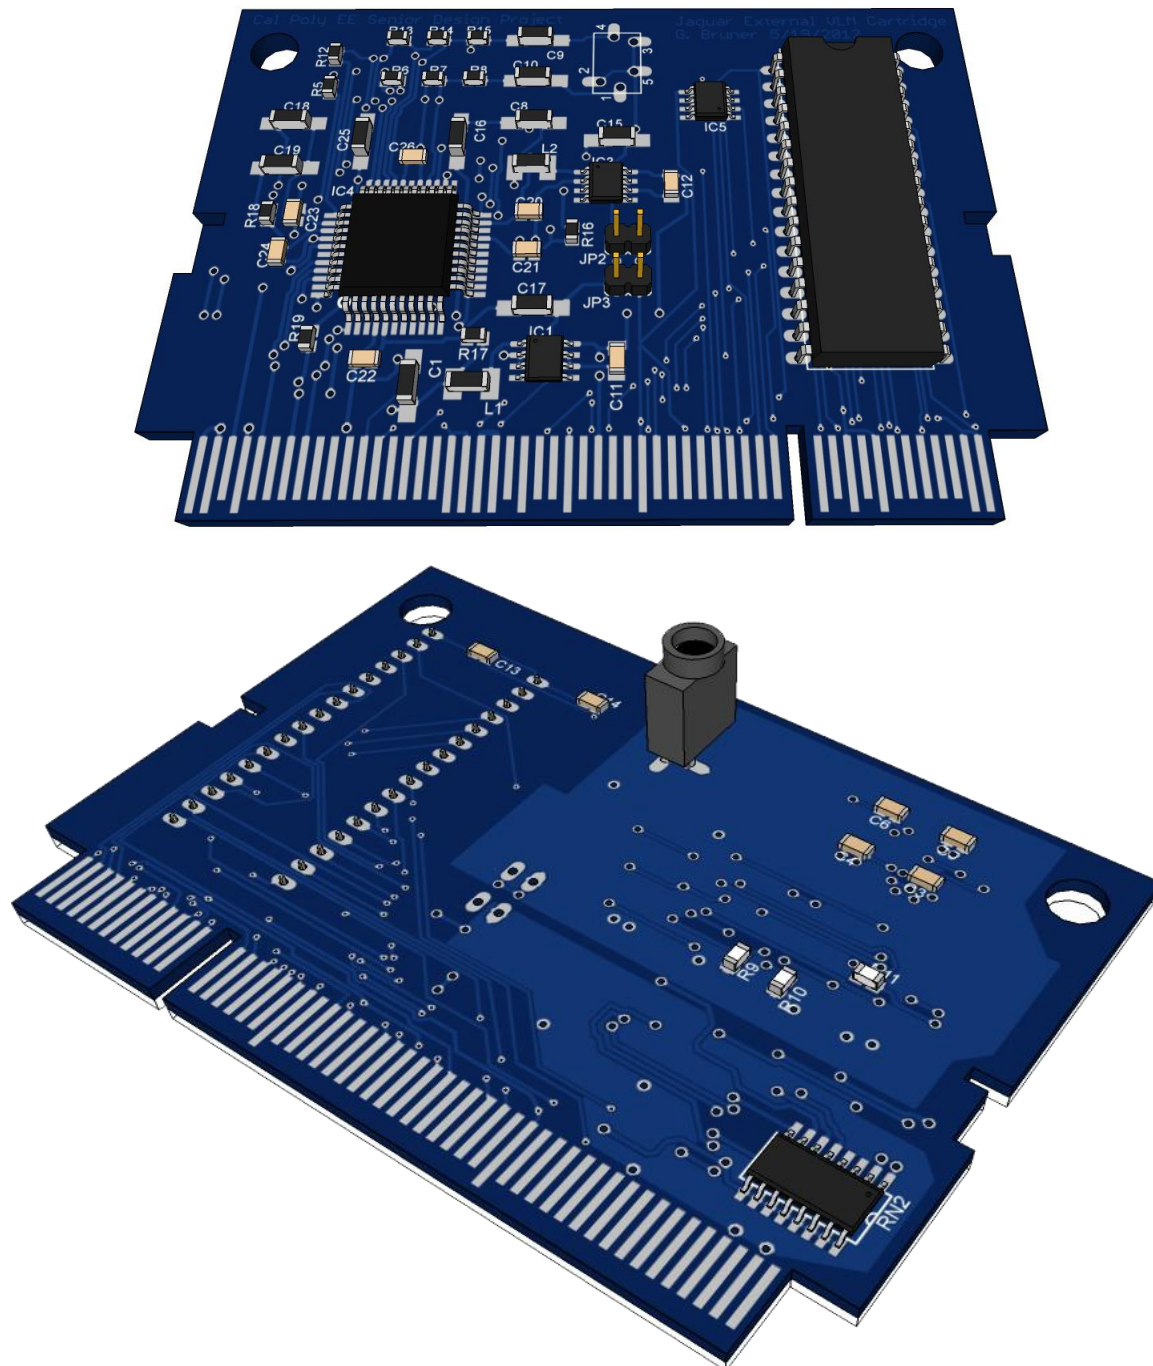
Google Sketch Up 3D Images of Final PCB Layout and Design
